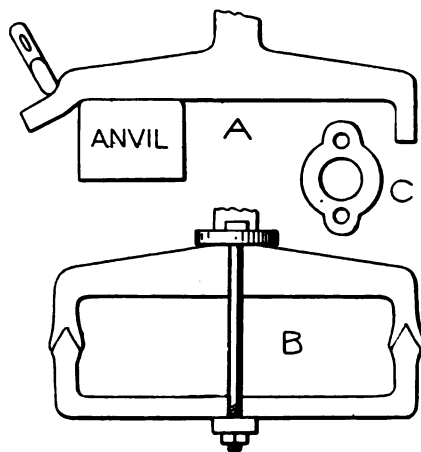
SHAPING AND WELDING THE VALVE YOKE.
